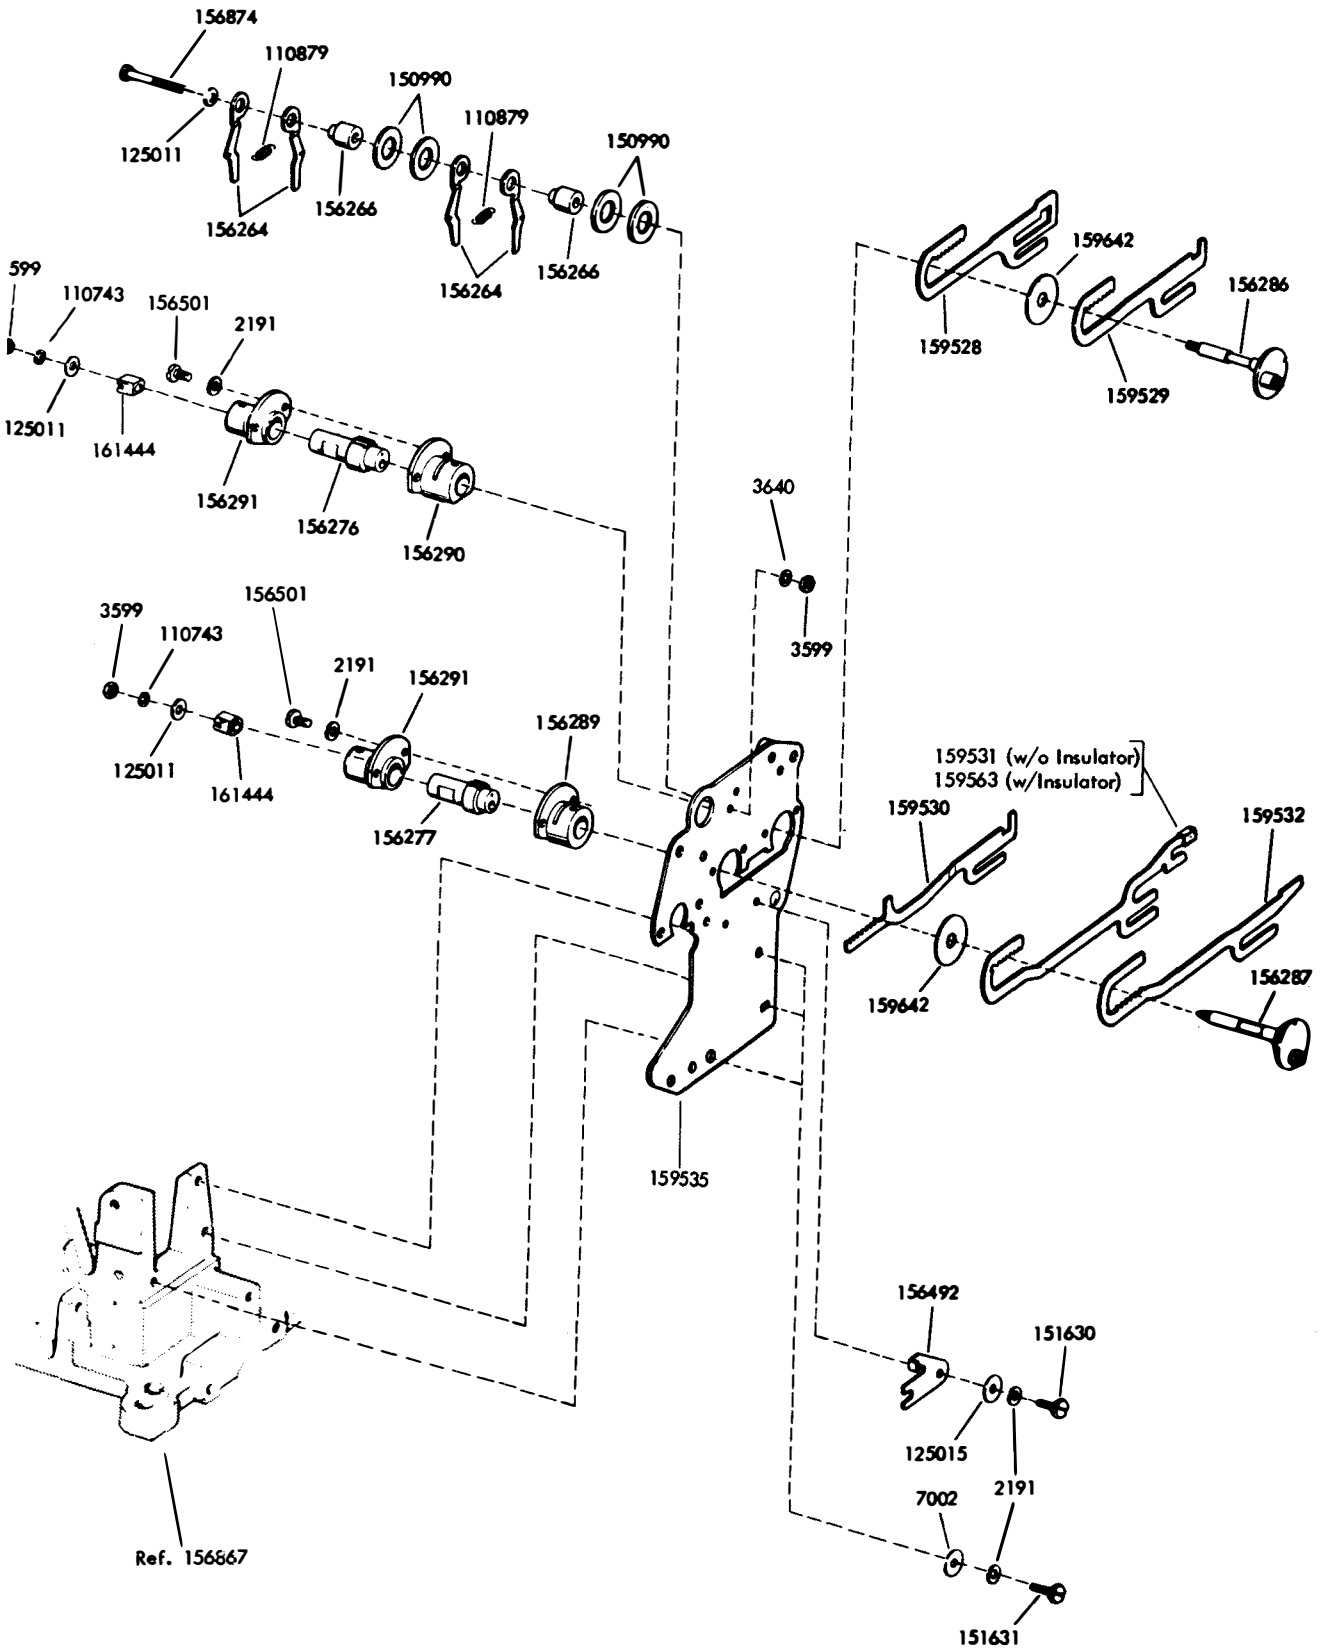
Rotary Positioning Mechanism (Sheet 1 of 2)
